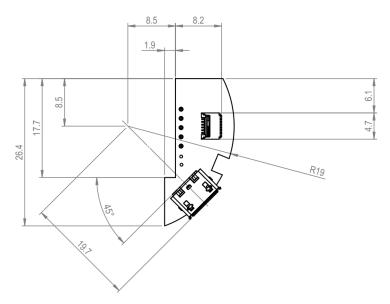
Mechanical drawing of electronics board (unit: mm). For detailed drawings, please contact <u>sales@optotune.com</u>.
